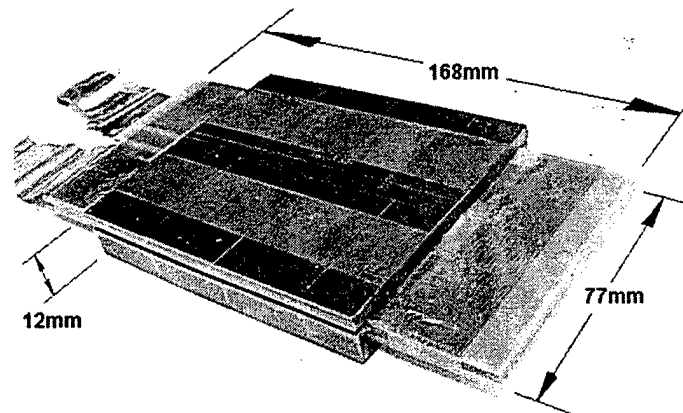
Outline and dimensions of the ISRM prototype.
